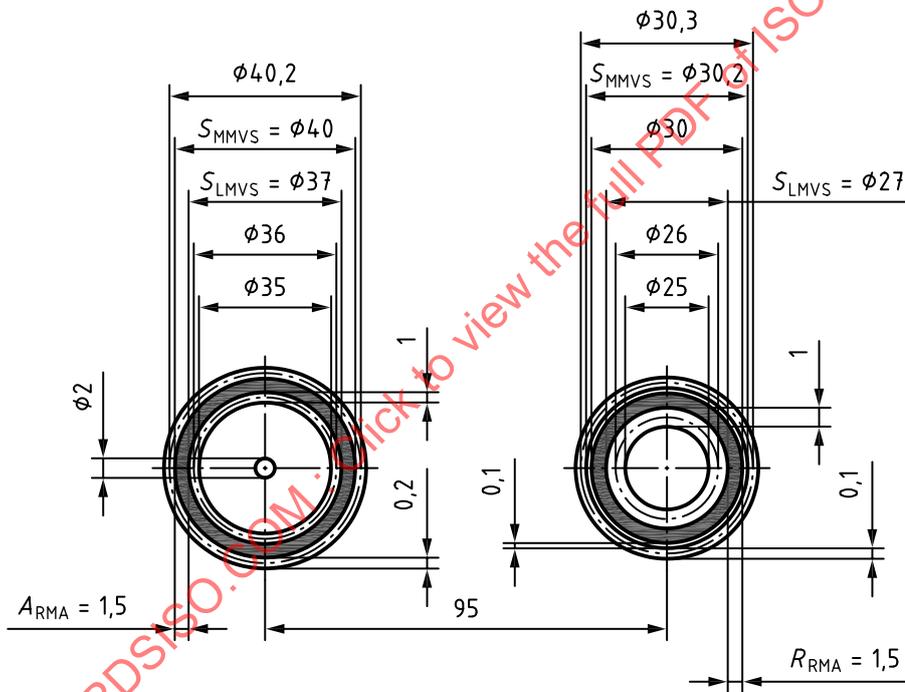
Feature of size (hole) relative to a cylindrical datum feature, combined drawing
